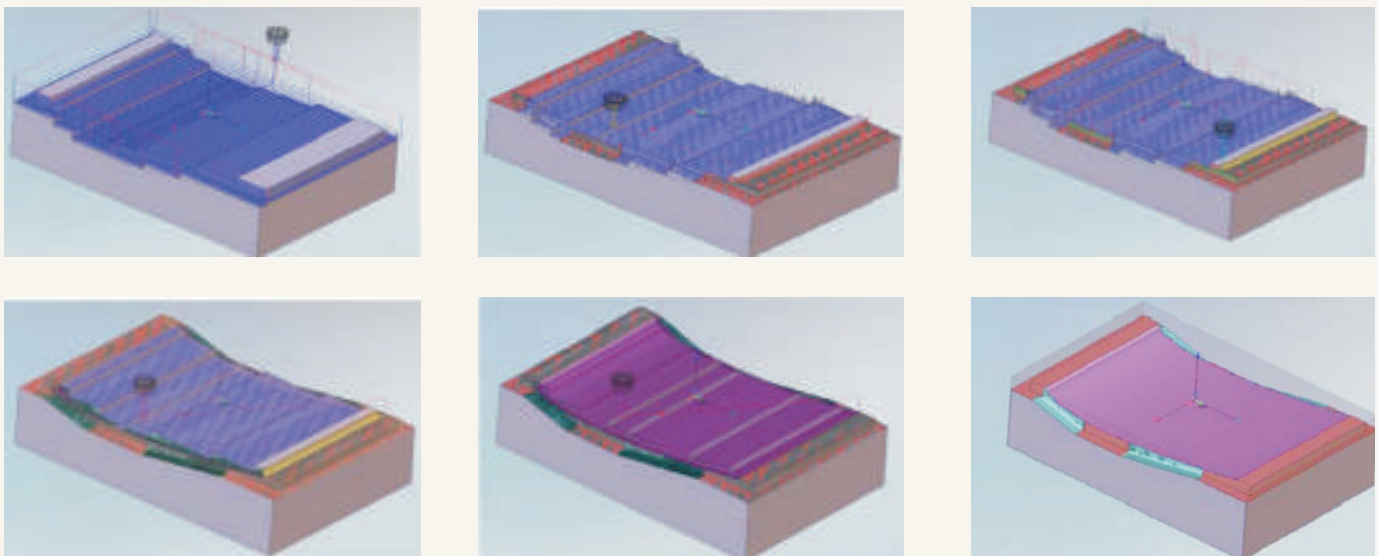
Strategy for cutting process using the 5-axis cutting machine MotionMaster TB 105.
